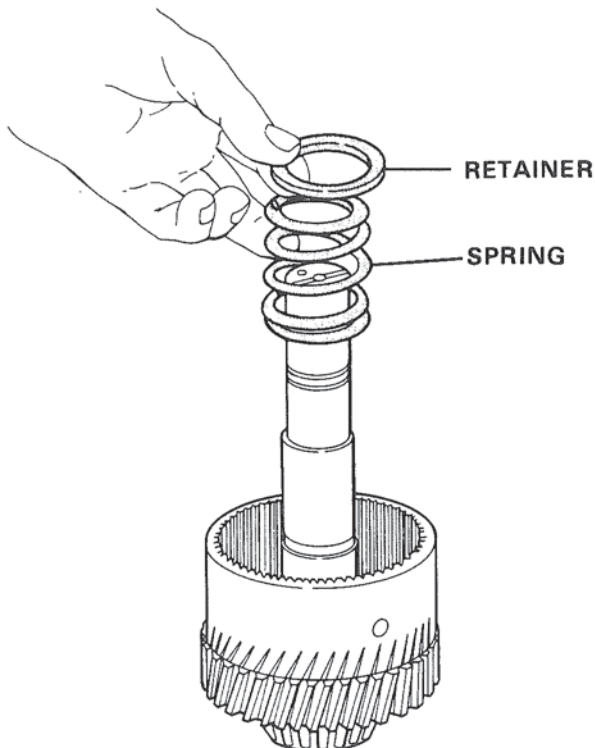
Removing Clutch Piston Return Spring and Retainer.
